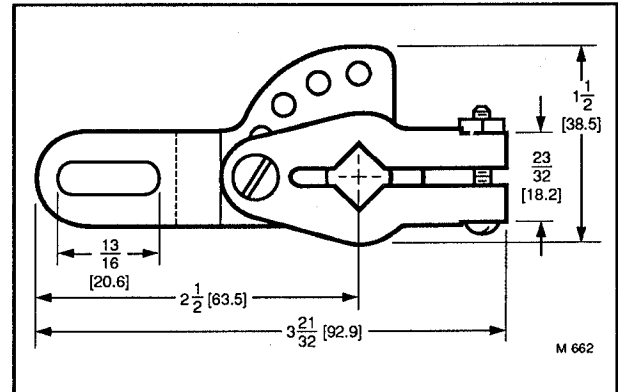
DIMENSIONS IN Ins. [mm IN BRACKETS] OF 106013D MOTOR CRANK ARM FURNISHED WITH ALL LINKAGES.
